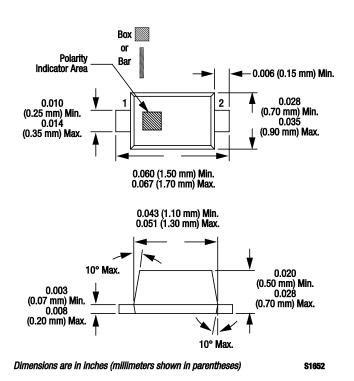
SMV1245-079LF SC-79 Package Dimensions
